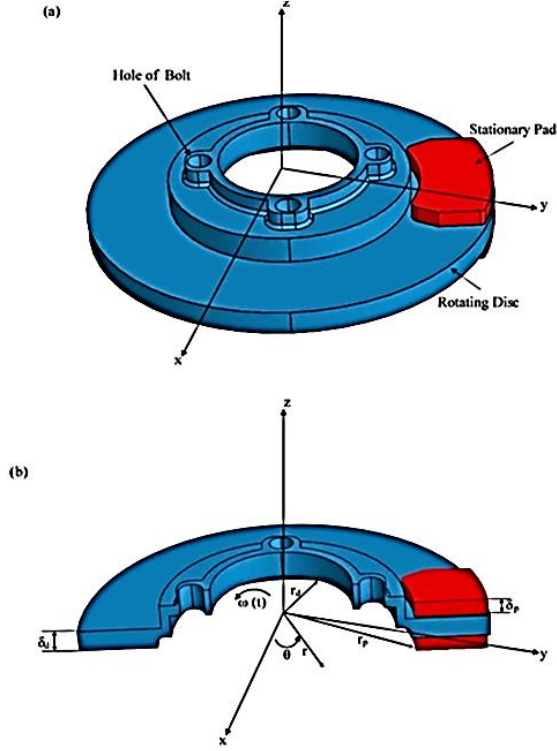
(a) Disc-brake system, (b) Section of disc-brake.
